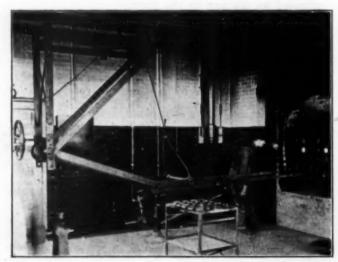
MUFFLE FURNACE AND CHARGING MACHINE
